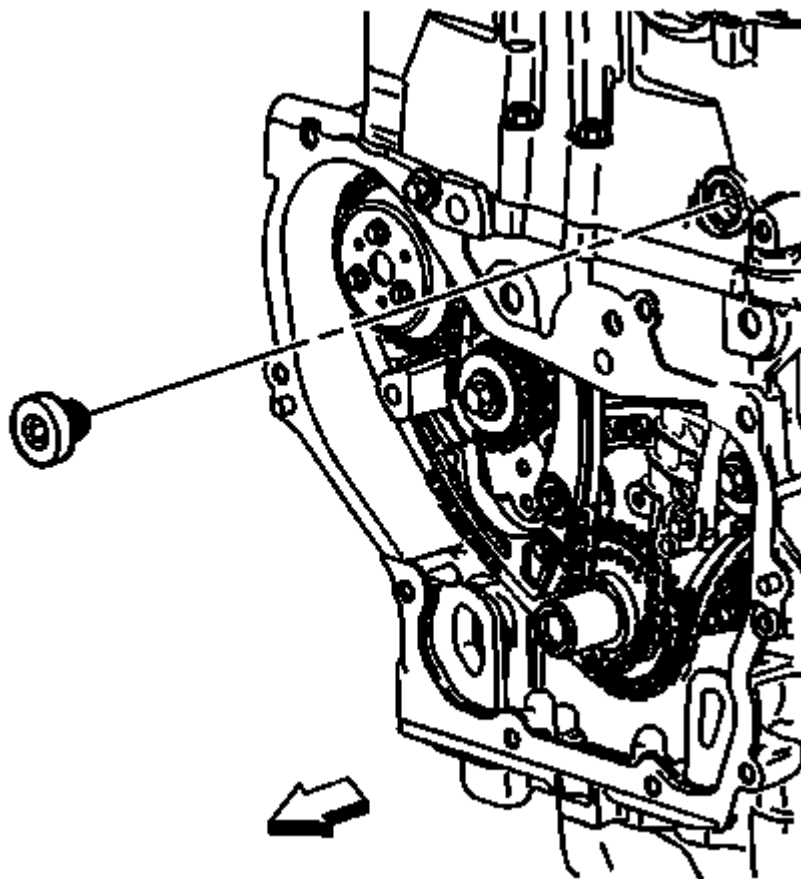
View Of Fixed Timing Chain Guide Access Plug
